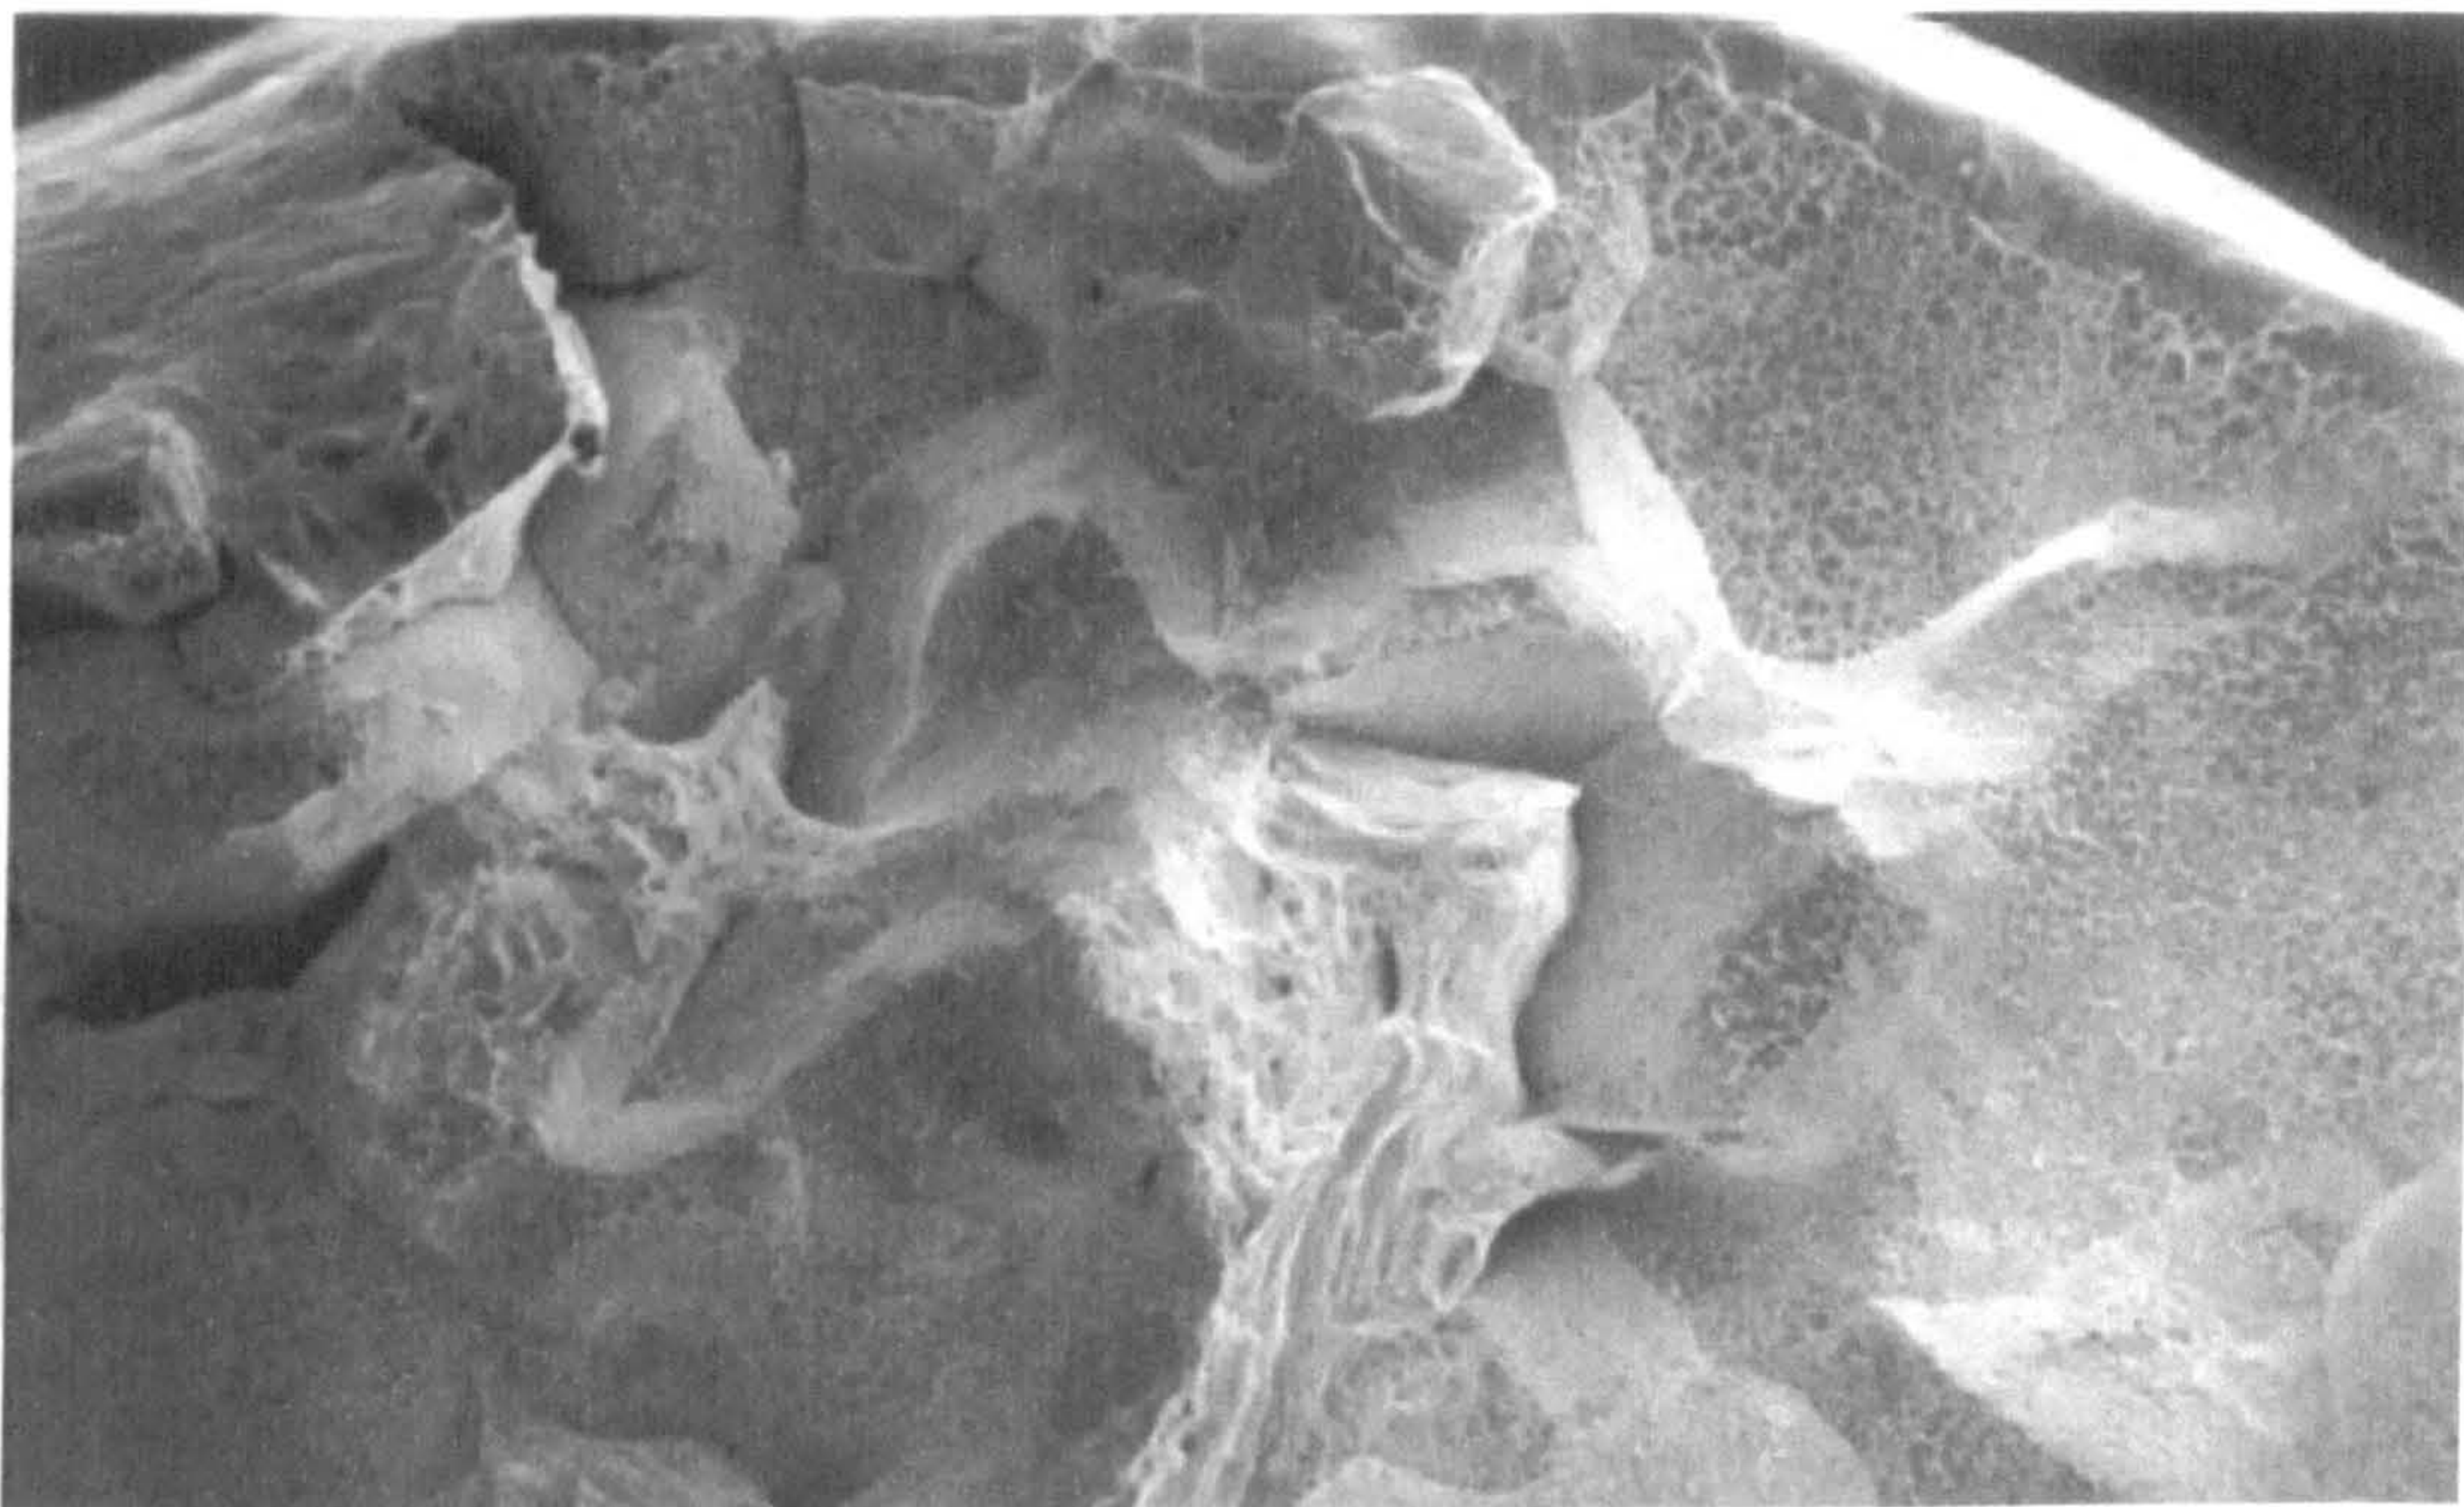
Typical Fracture Surface of C-Mn-Al steel containing 0.013%Ti tested at 800°C
